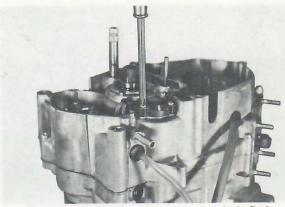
Unscrewing neutral switch fitting screws with cross head screw driver
